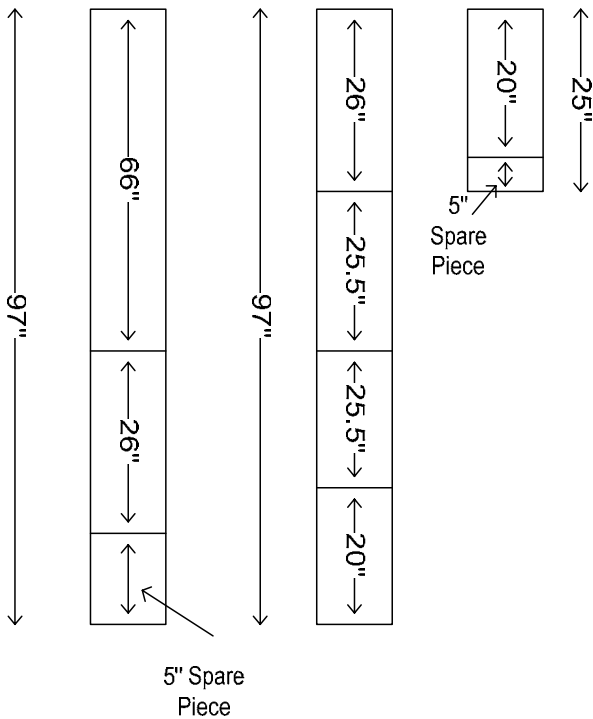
Dimensions required to cut 1x1" 80/20 extrusion
